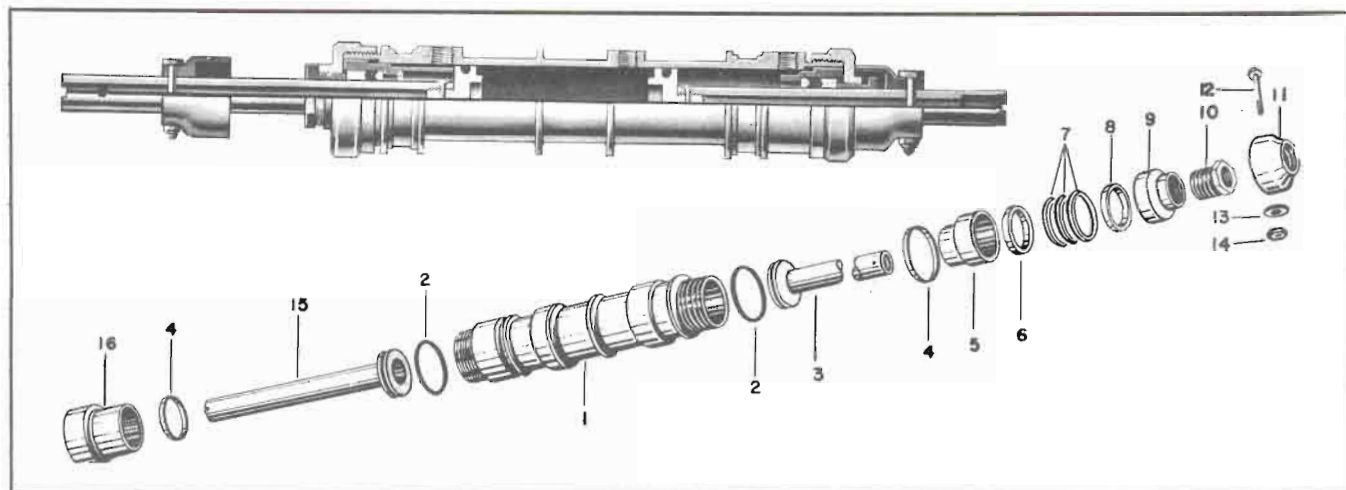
Ratchet Valve Relief Valve Adjustment Spring Cap
